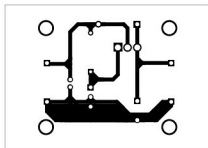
Actual-size PCB layout of the variable power supply circuit
